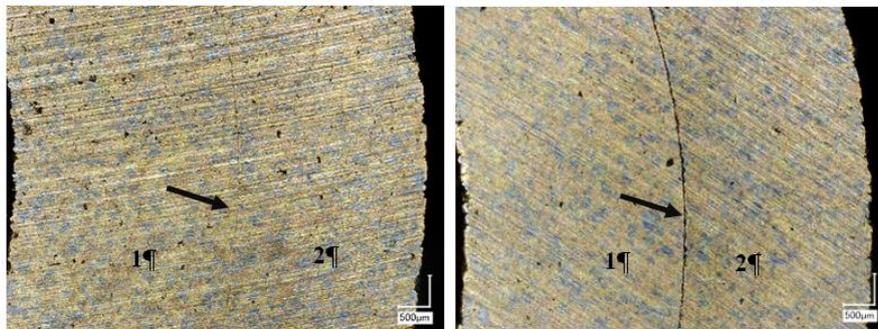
Samples of joints fragments showing tight (left) and weak (right) PMD crimping: 1 – inner bushing; 2 – outer bushing; arrows show boundary between inner and outer parts.
